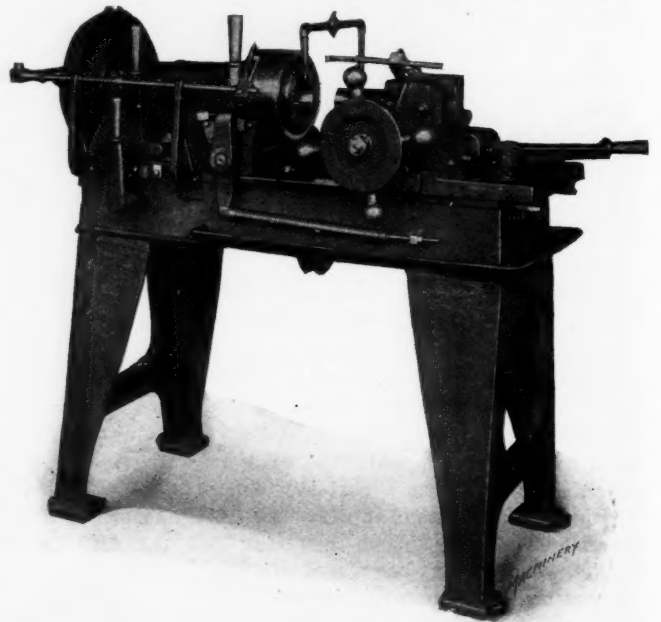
Opposite Side of Machine showing Vise Support and Two-speed Drive
